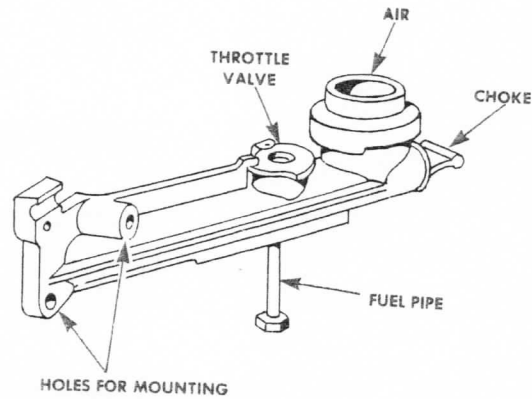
Parts of a vacuum carburetor. (Briggs & Stratton Corp.)
